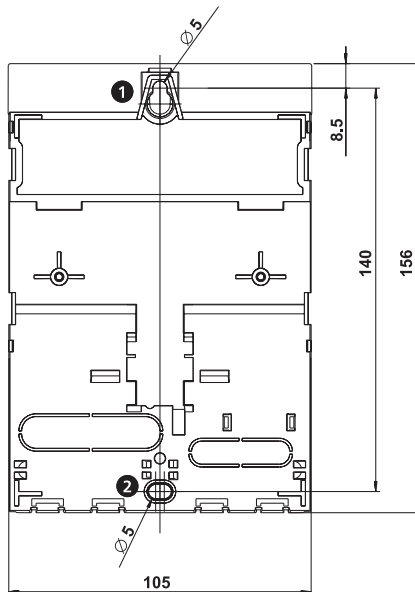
Rear side of the controller with the upper ❶ and lower mounting holes ❷
